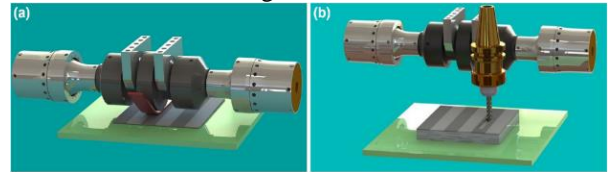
Illustration of UAM process: (a) welding of aluminum tape and (b) periodic machining operations [54].
